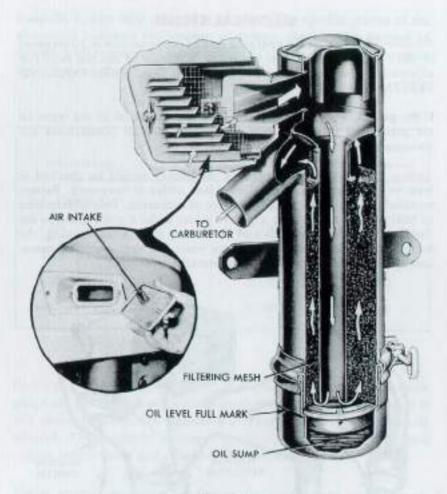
Sectional View of Carburetor Air Cleaner (Series 601)
